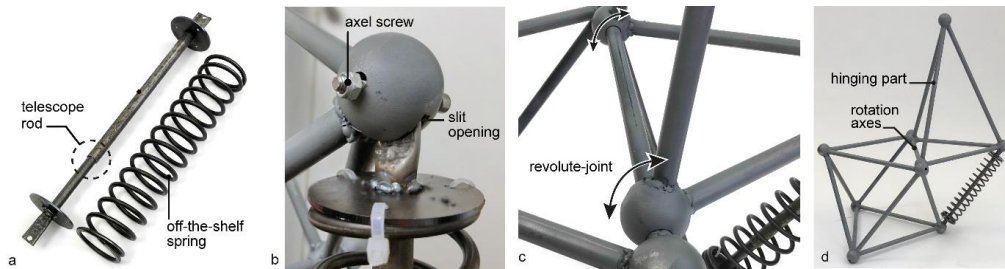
(a) Spring-telescope fabricated using two fitting tubes. (b) Slit opening on a sphere for inserting the telescope. (c) Revolute-joint connection. (d) Assembled chair model with a springy backrest.
